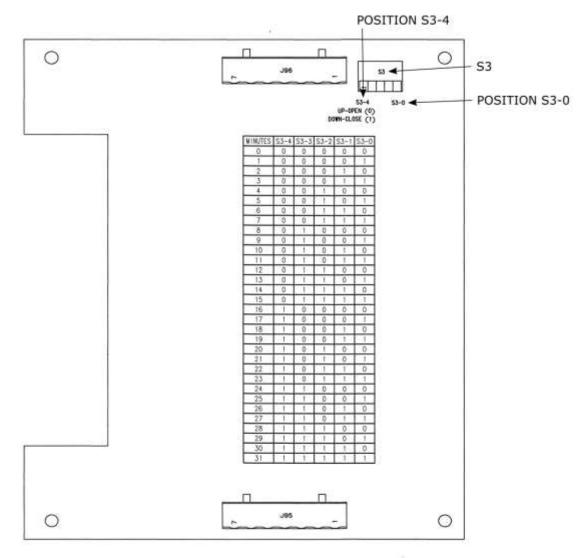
Transfer Module Assembly, A80468, S3 Switch Position
